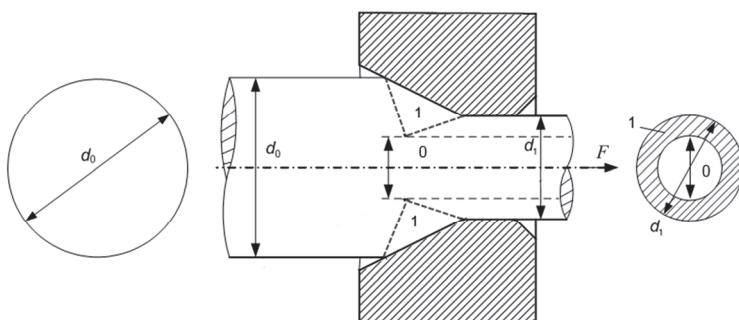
The basic scheme of the metal flow in a conical deformation zone during rod drawing: 0 – tensile stress zone; 1 – compressive stress zone.
